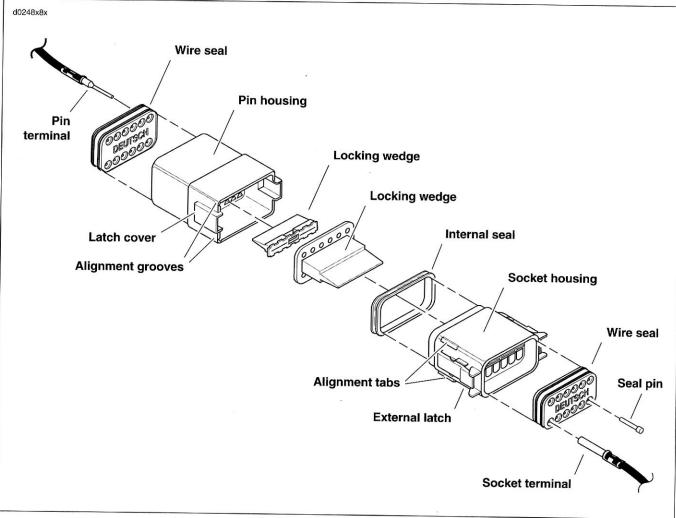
12-pin Deutsch Connector (Exploded View)
